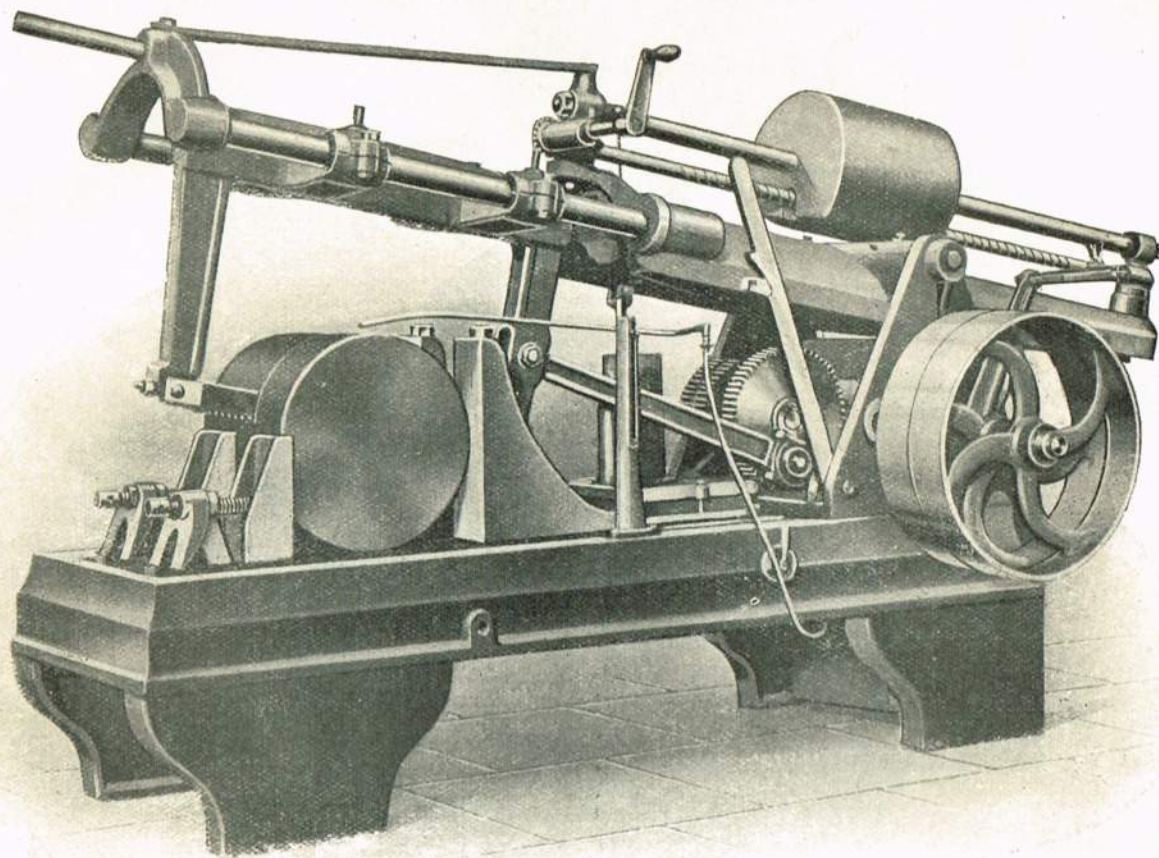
Illustration of 10" Machine. "MASSIVE" Pattern.
